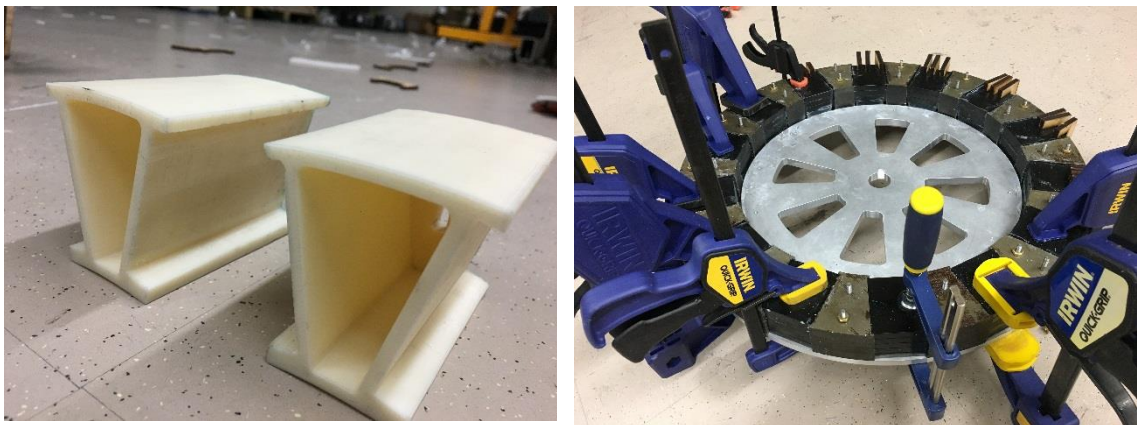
Inner rotor assembly process, Second stage of the MSMG design.
